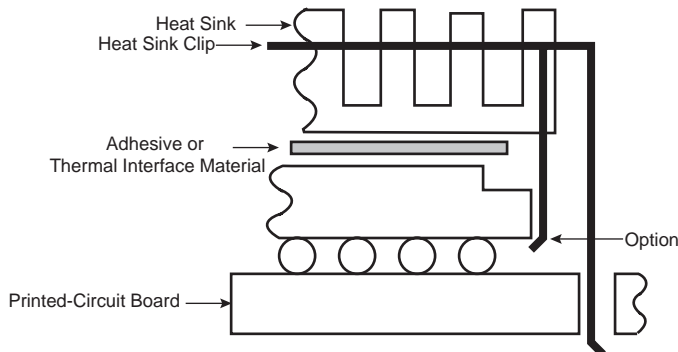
C4 Package with Heat Sink Mounted on a Printed Circuit Board
